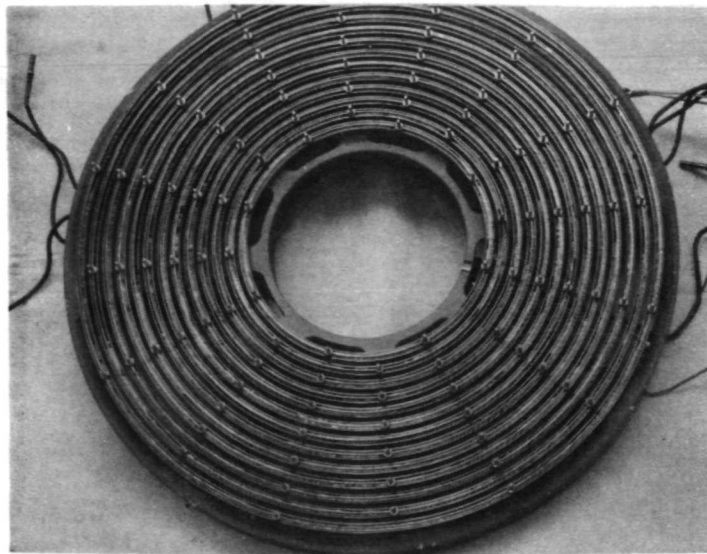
Stator Platter of Cup Gap Rings After Disassembly
